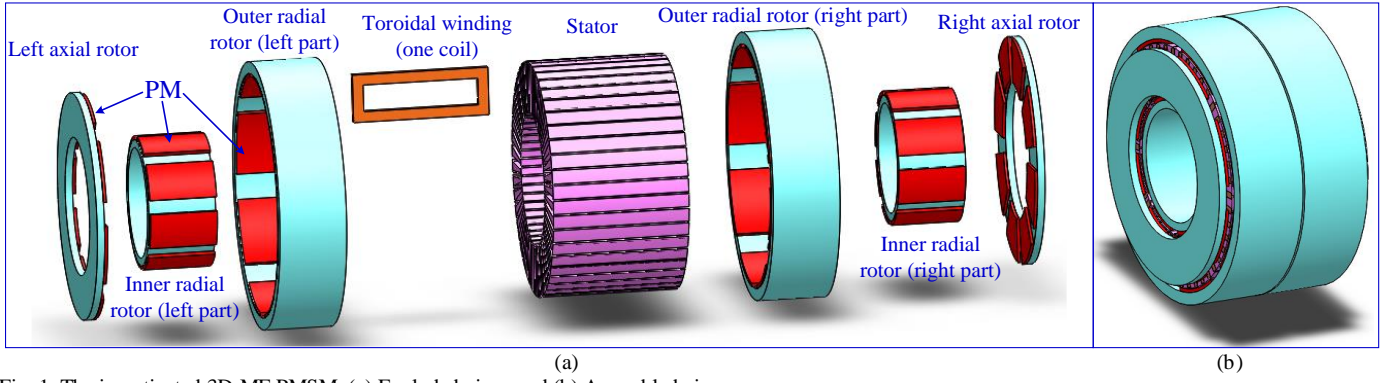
The investigated 3D-MF PMSM. (a) Exploded view, and (b) Assembled view.
